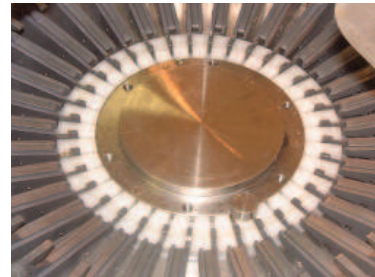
After removing retainer disc (trigger mount disc)
